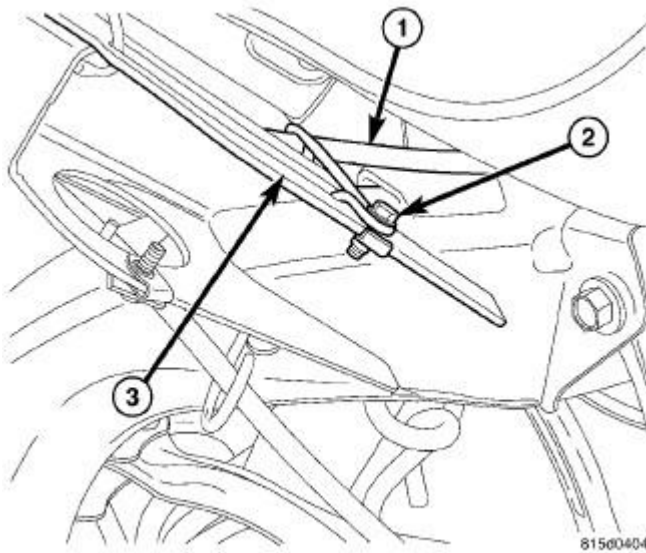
FRONT CABLE AT LEFT FRONT OF CROSSMEMBER
